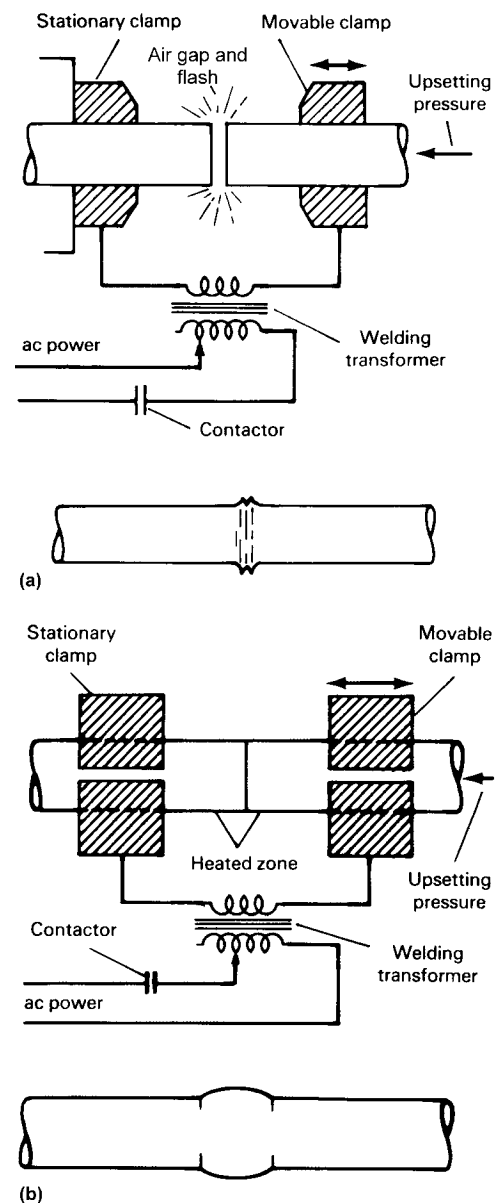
Flash and upset welding process features (top) with typical profiles of resulting joints (bottom). (a) In flash welding, heating from an arc occurs before the upsetting operation is initiated. (b) In the upset welding process, electric current is applied while the pieces are pressed together.
